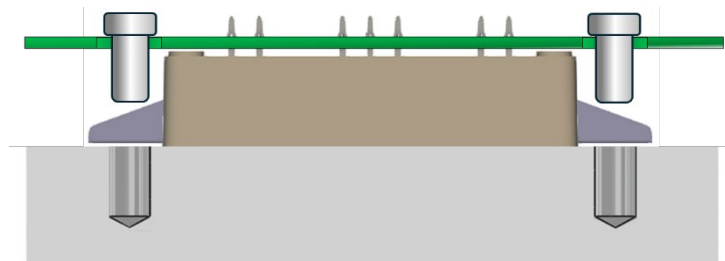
Module with cross-sectional view of heatsink and PCB with module mounting screws
